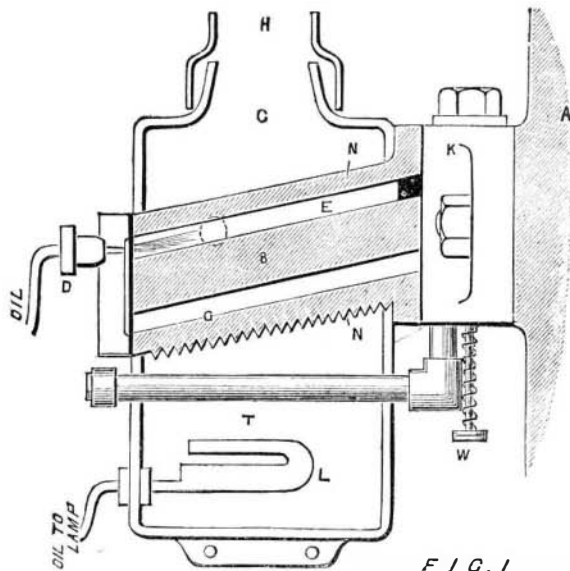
VAPORIZER, HOWARD OIL ENGINE.
